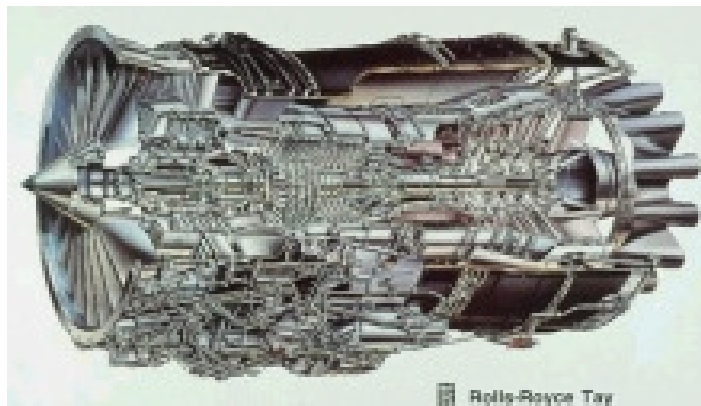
Rolls-Royce TAY650-15 cut-away drawing
